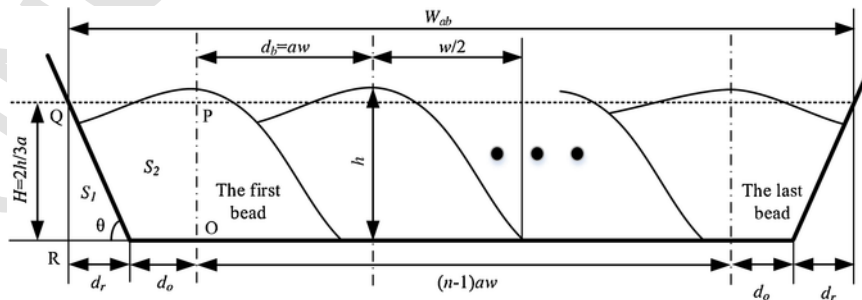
The cross-sectional profile of a layer to be deposited in a groove.
